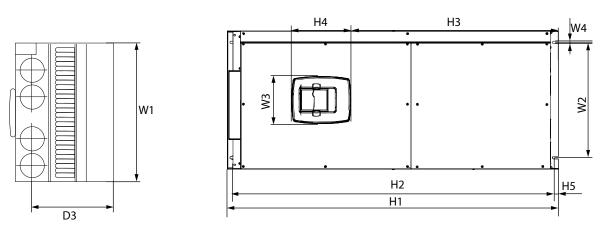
Dimensions of the VACON® NXS/NXP AC Drive, FR9, IP21/IP54
